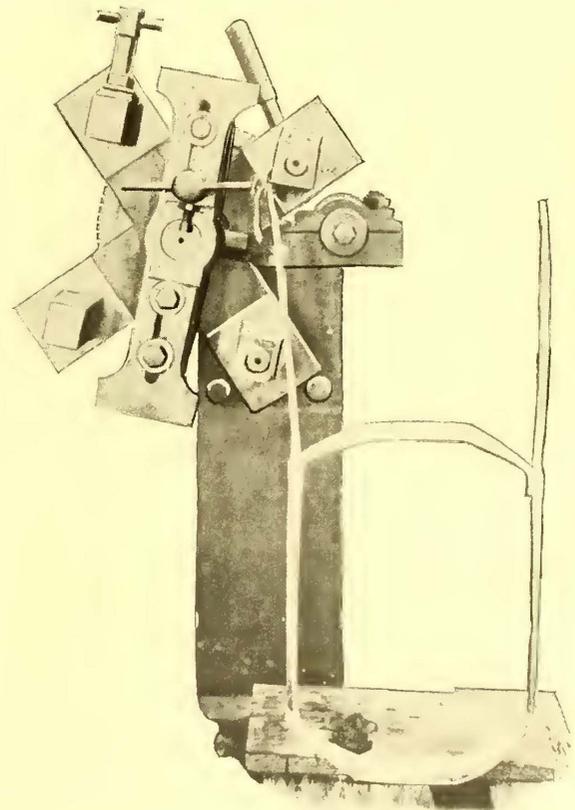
ARMATURE COIL WINDER FOR WESTINGHOUSE 49 MOTORS
